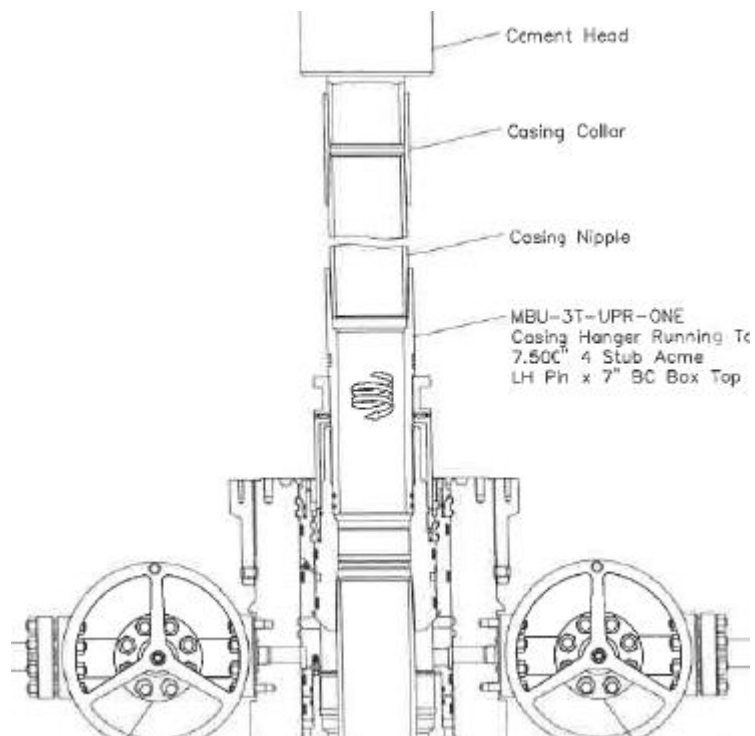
Cactus 7" 5M offline cementing tool. Pressure rating limited by the lesser of 5M tool rating or the 7" pup joint and casing.
